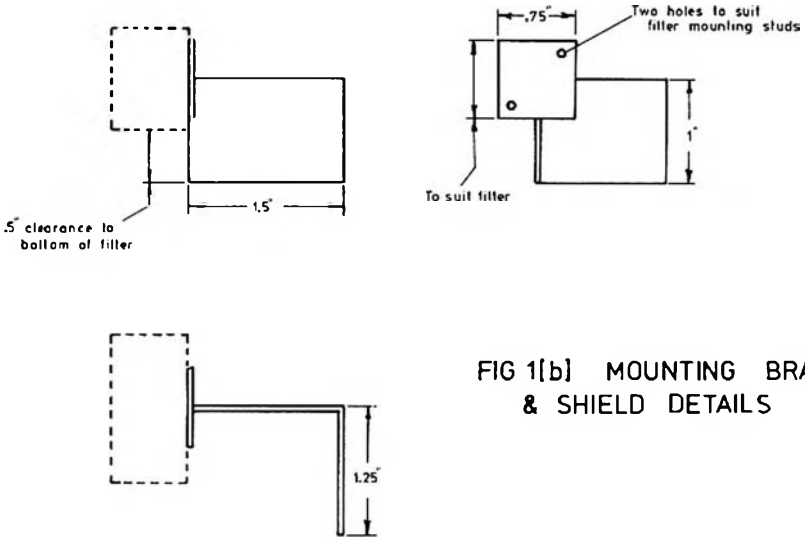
[b] MOUNTING BRACKET & SHIELD DETAILS
